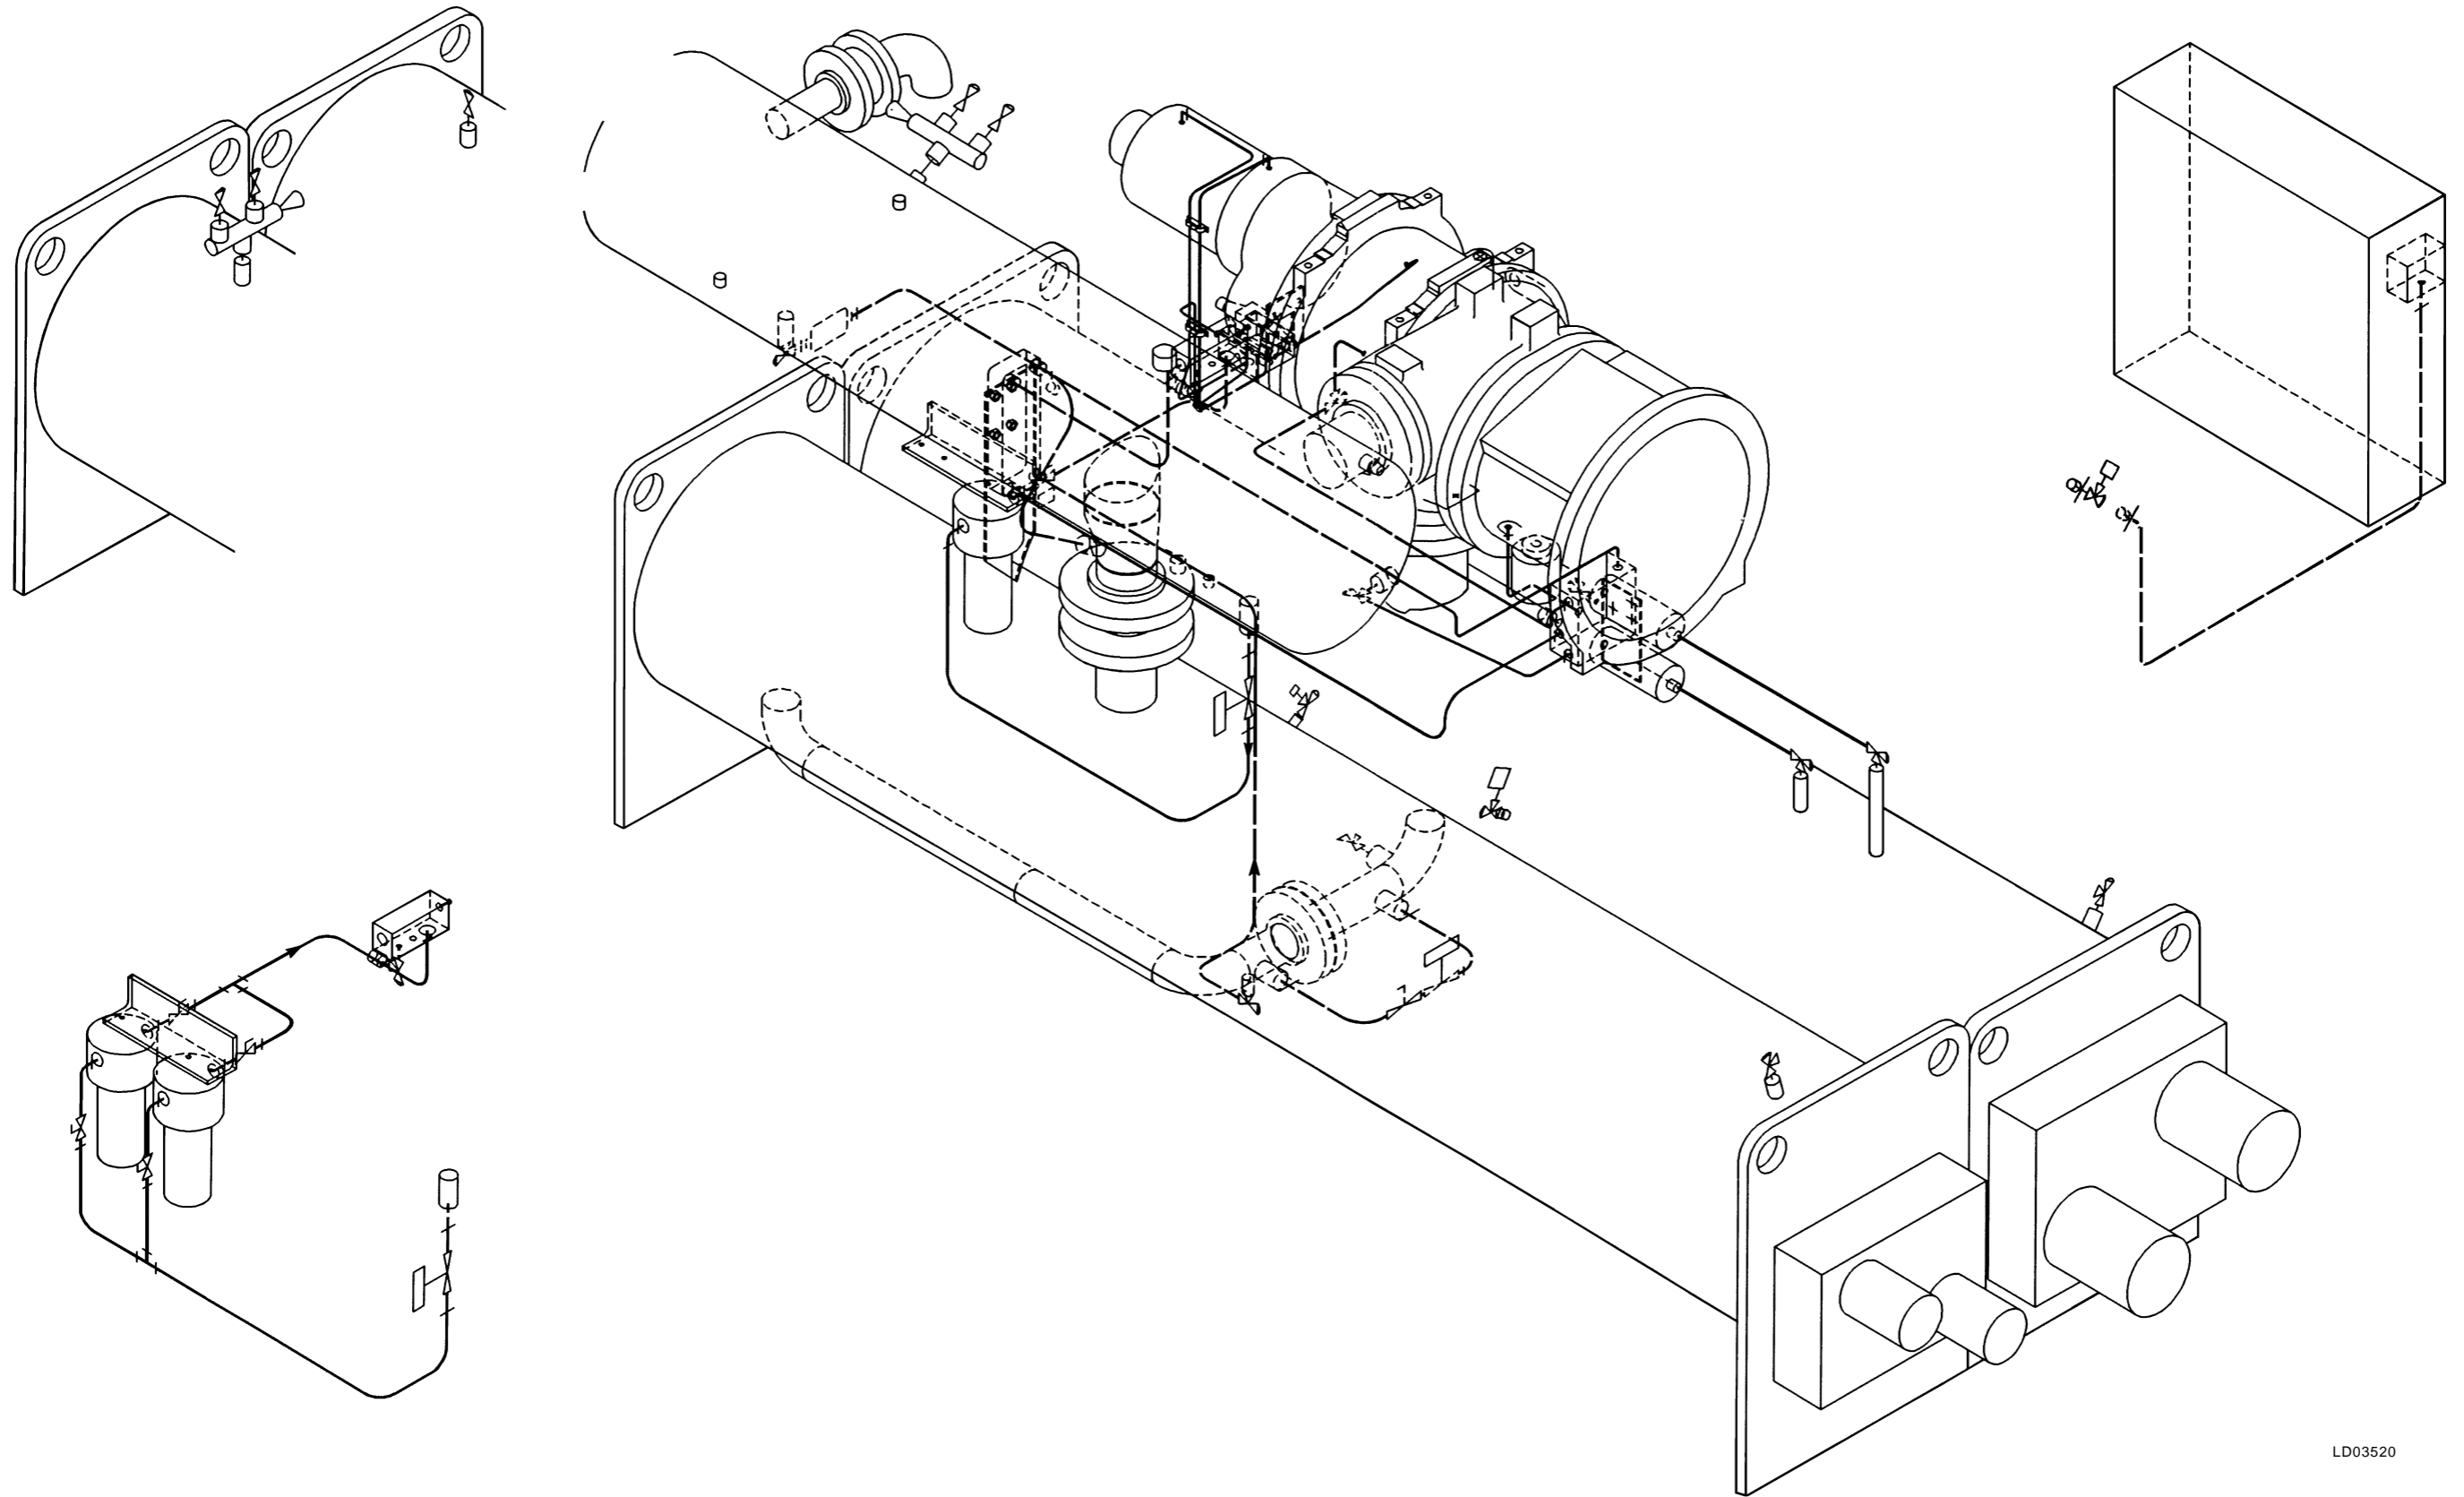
TYPICAL SYSTEM PIPING DRAWING
